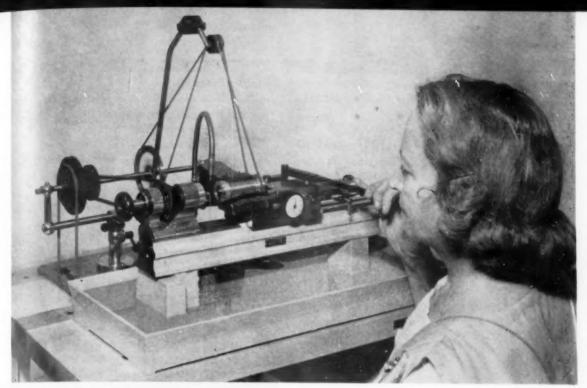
Watchmaker's lathe equipped with a microdrilling attachment. Collet at right holds pivot drill, while opposing collet contains workpiece. Both collets revolve during drilling.
